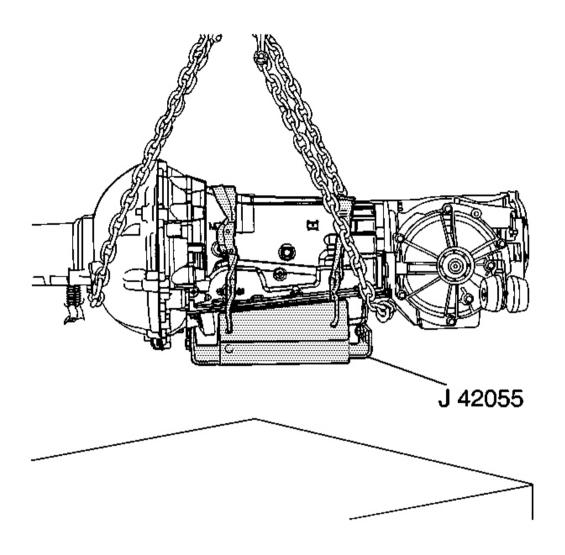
J 42055 & Transmission Jack Courtesy of GENERAL MOTORS CORP.
